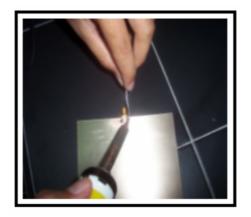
Soldering technique for soldering the port / feeder to microstrip board.
